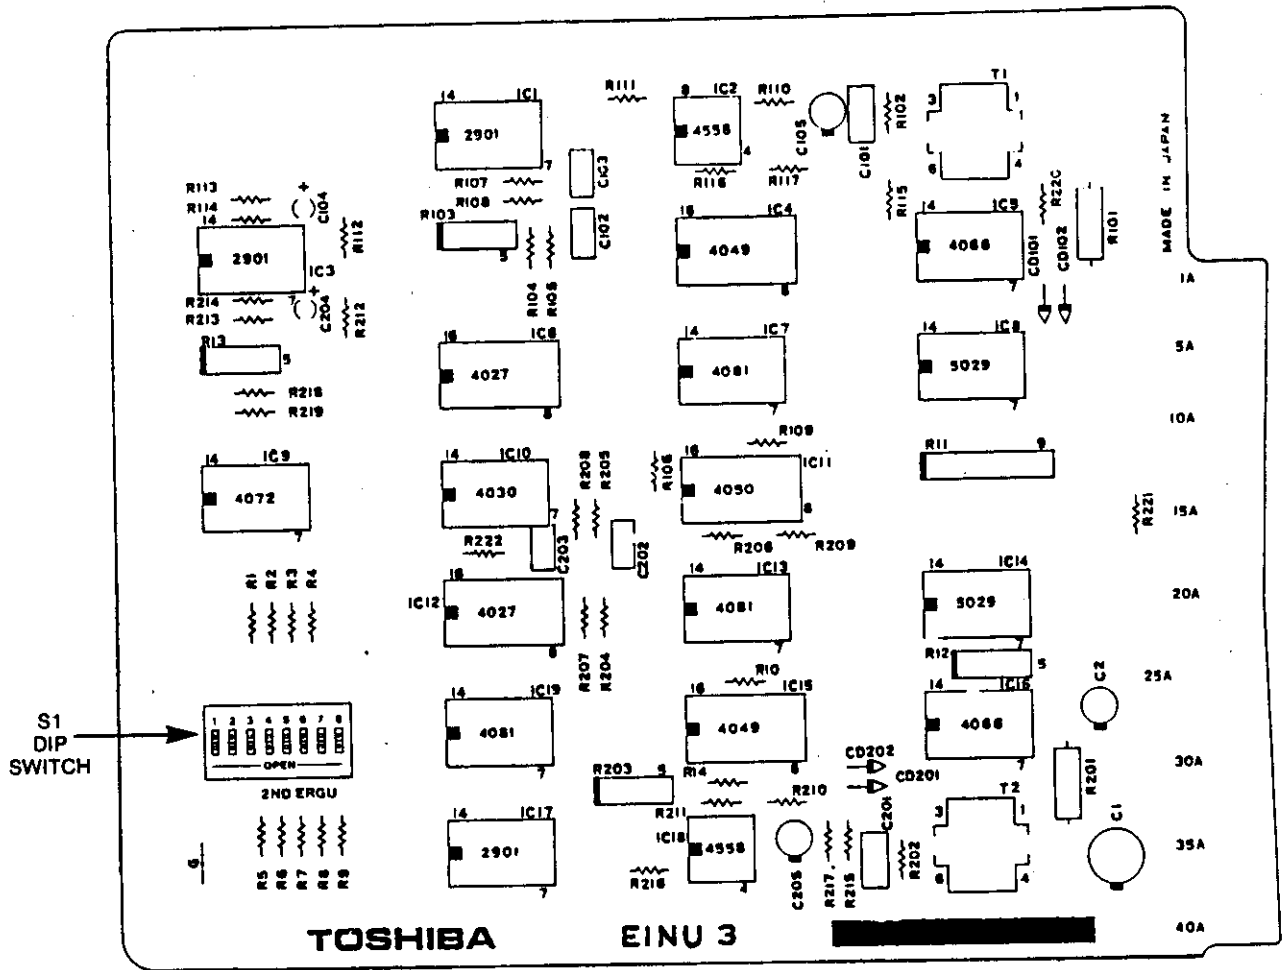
EINU-3 PCB - PHYSICAL LAYOUT
